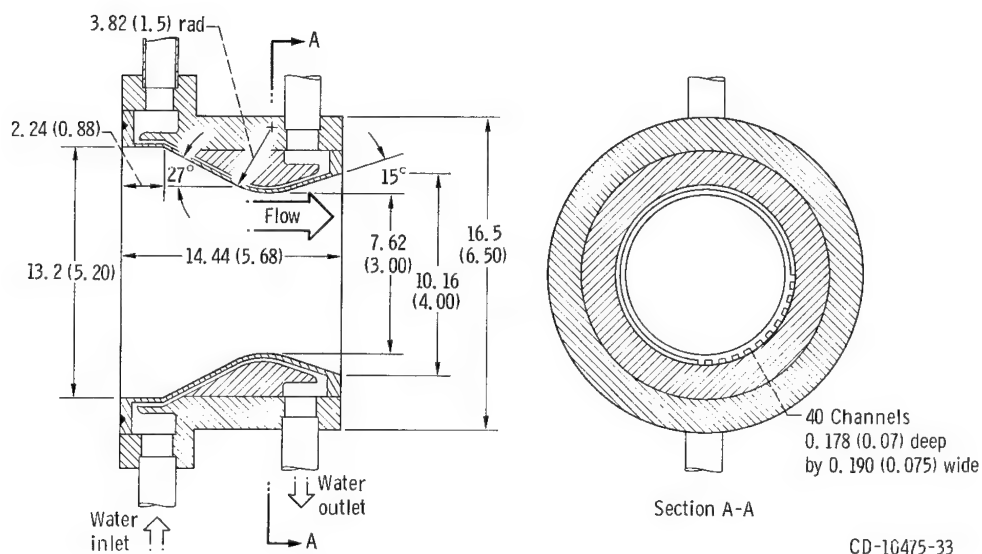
Thrust chamber assembly: heat sink chamber and nozzle.
